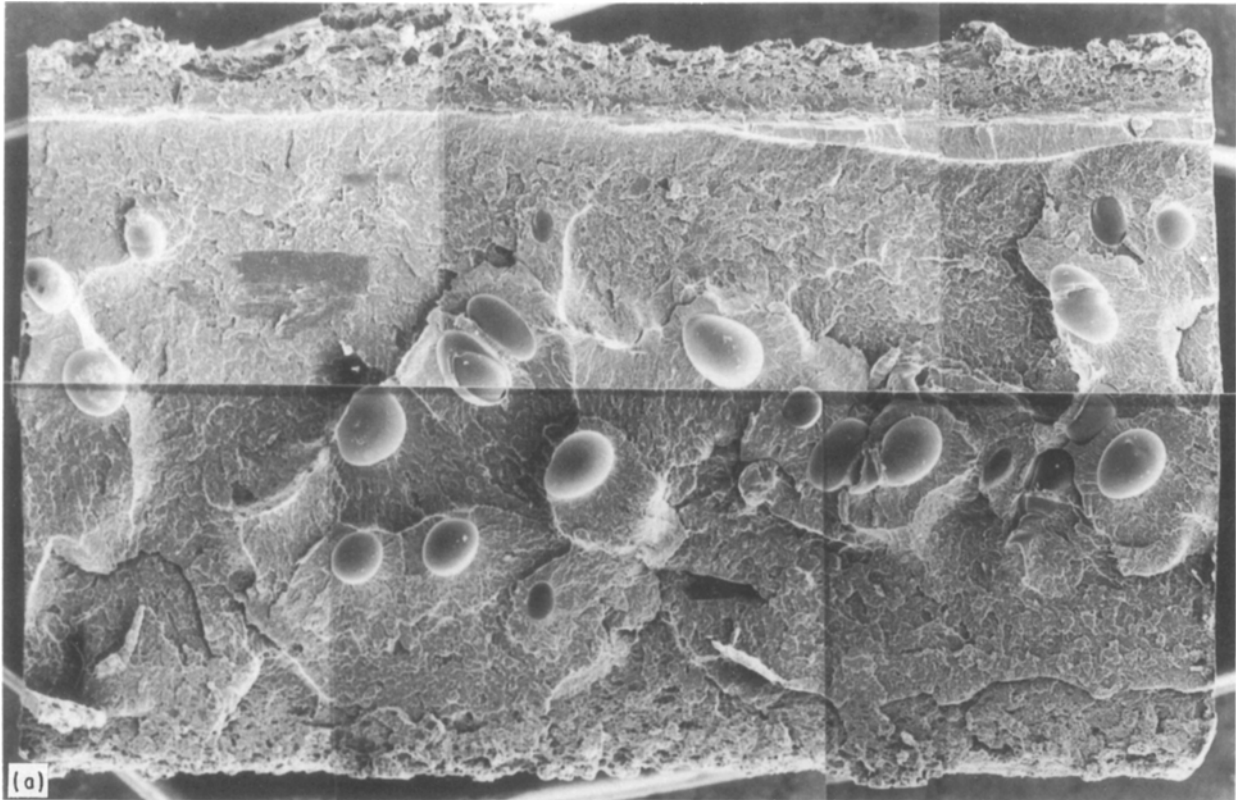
Fracture surfaces (6.35 mm × 12.7 mm) of a 5% density reduction M-PPO-SF welded specimen (Specimen 3: $p_0 = 0.52$ MPa, $\eta_F = 0.64$ mm).
